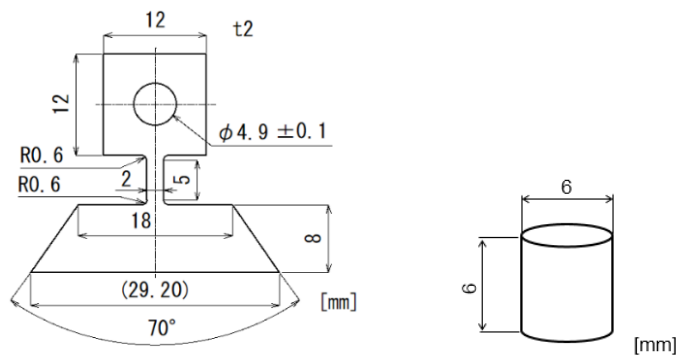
Shape and size of test piece (Left: Tension, Right: Compression)
